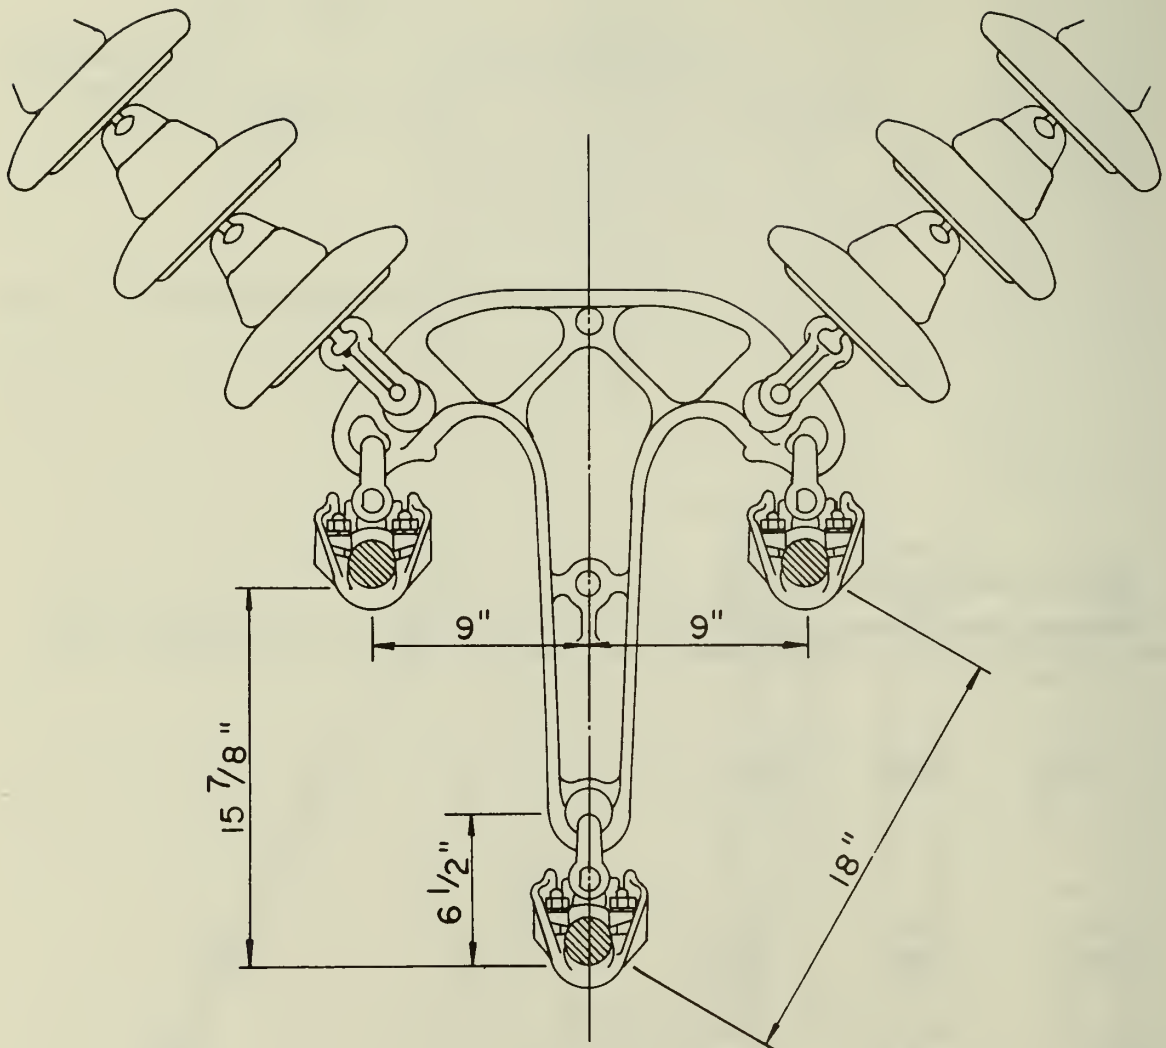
Triangular Three-Conductor Bundle Assembly.
